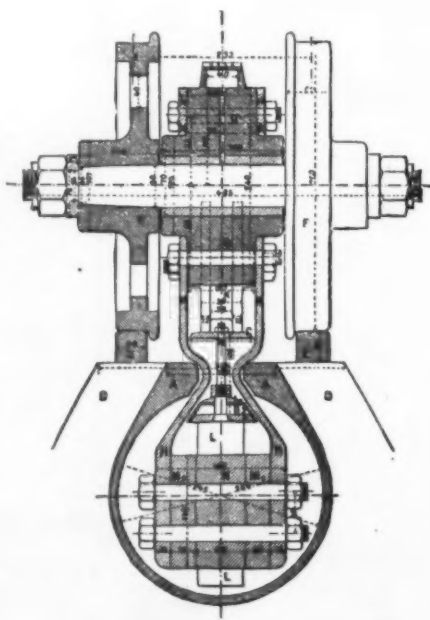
SECTION OF THE TUBE AND BUFFER CAR.
